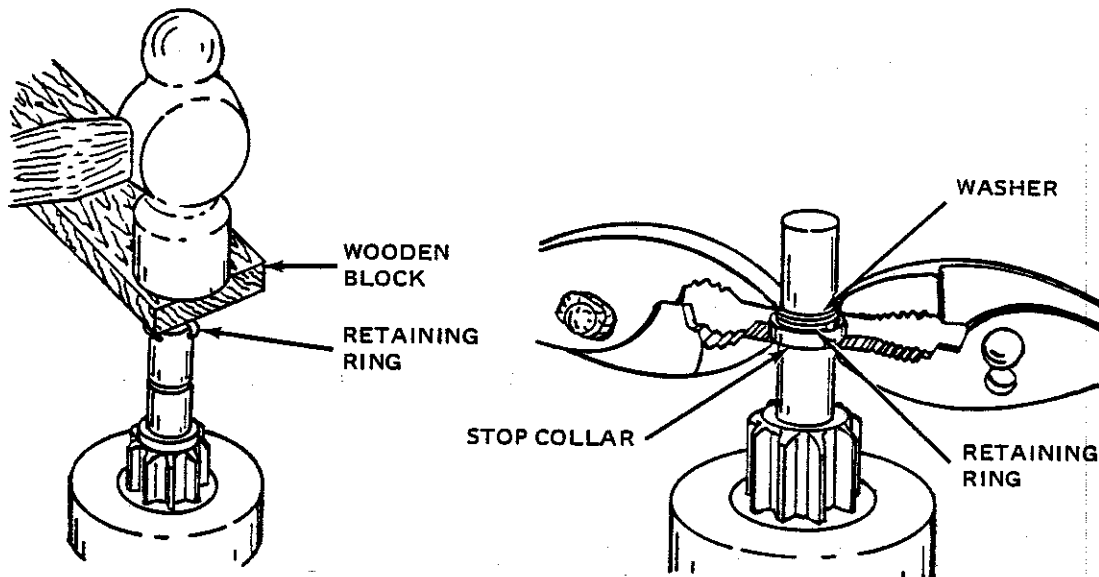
Forcing Retaining Ring Over Shaft and Retainer Over Ring
